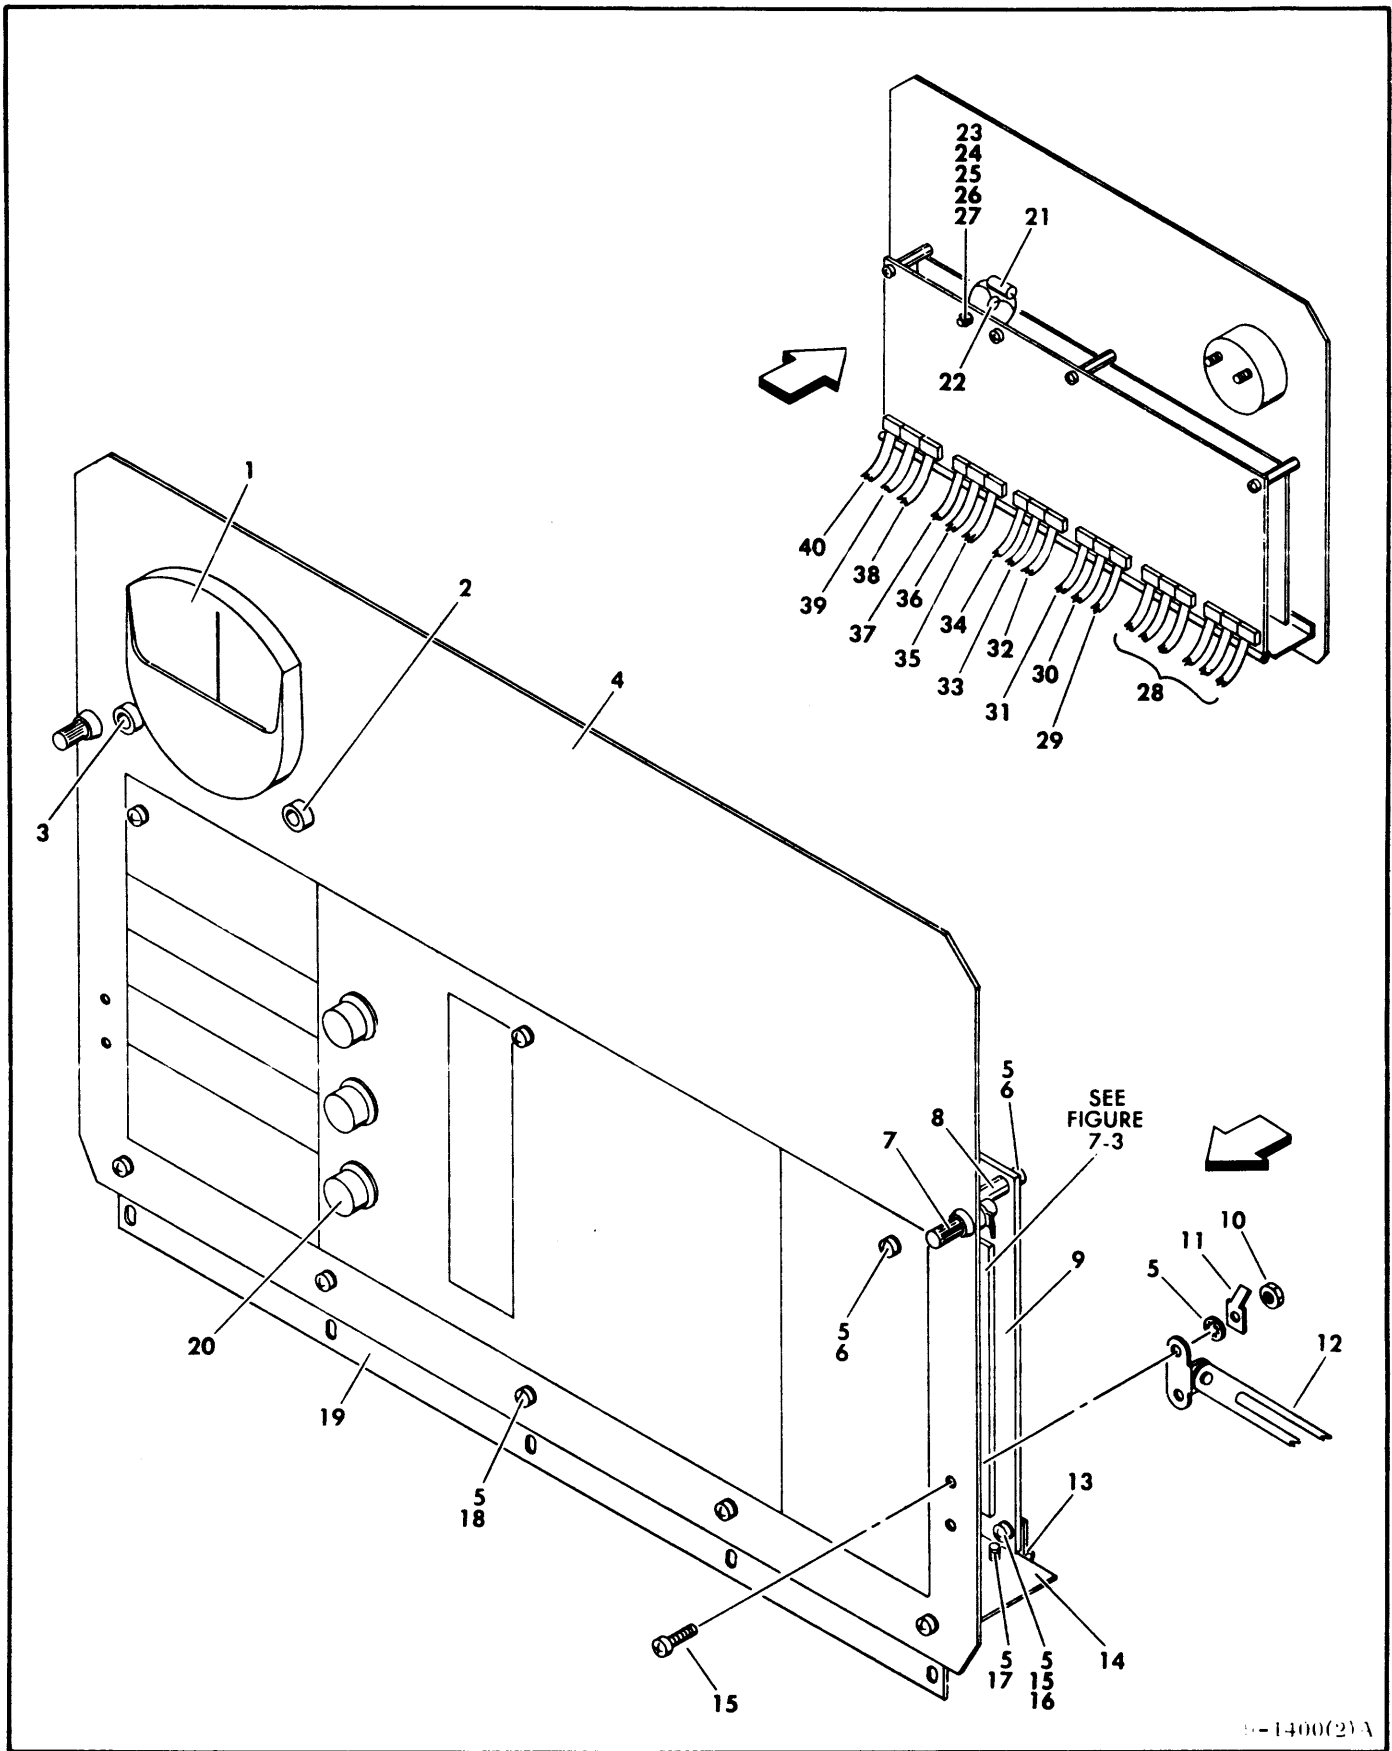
FINAL ASSEMBLY, STANDARD PACKAGE
